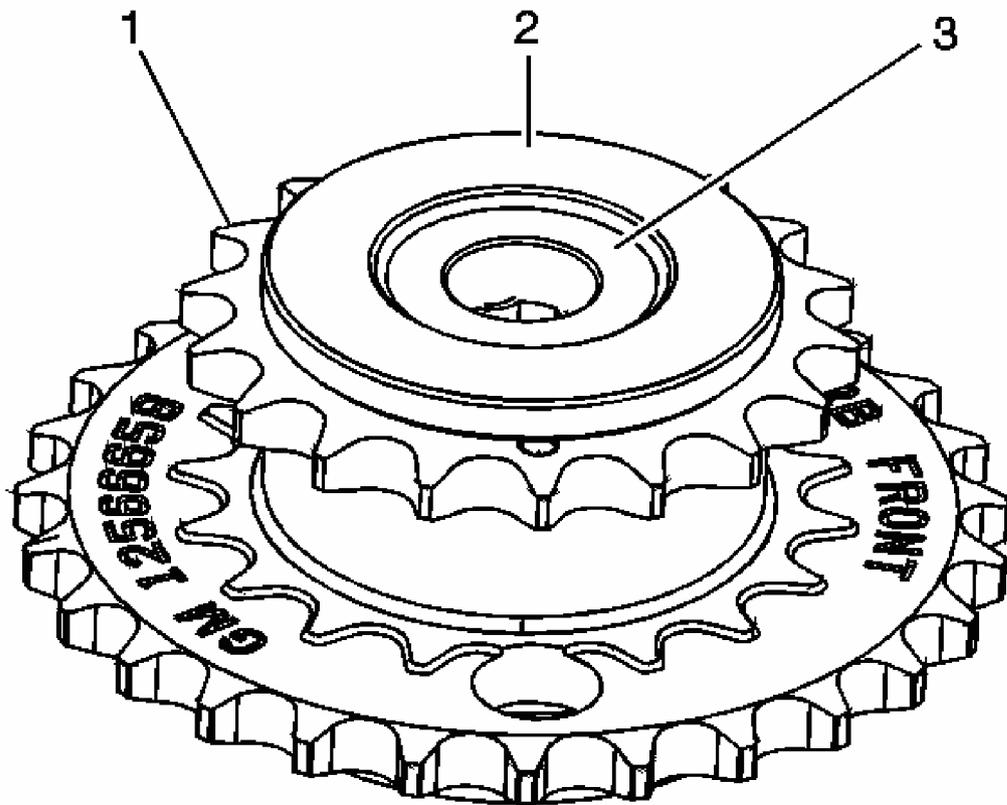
Identifying Front Of Right Intermediate Sprocket Inspection Areas
